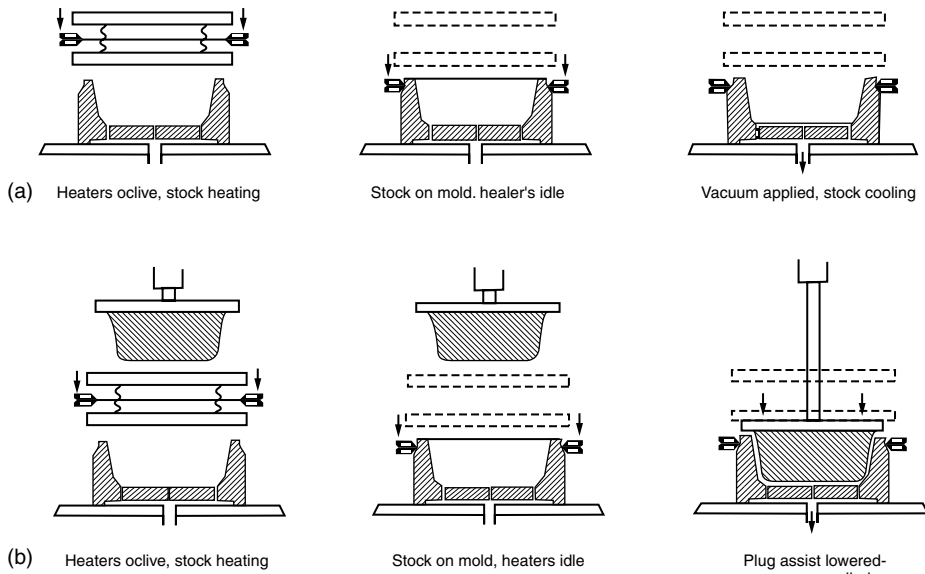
(a) Vacuum forming. (b) Plug-assist forming using vacuum.
